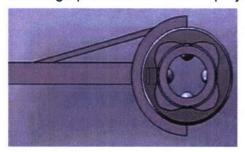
Cross section of the torque arm, sleeve, bearings, and breech.
